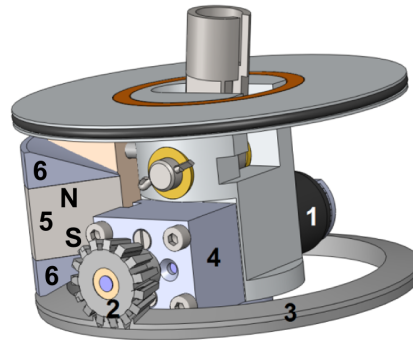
View of the wheel (whithout the bell): (1) motor, (2-3) conical gears, (4) motor support, (5) magnet and (6) flux guides.
